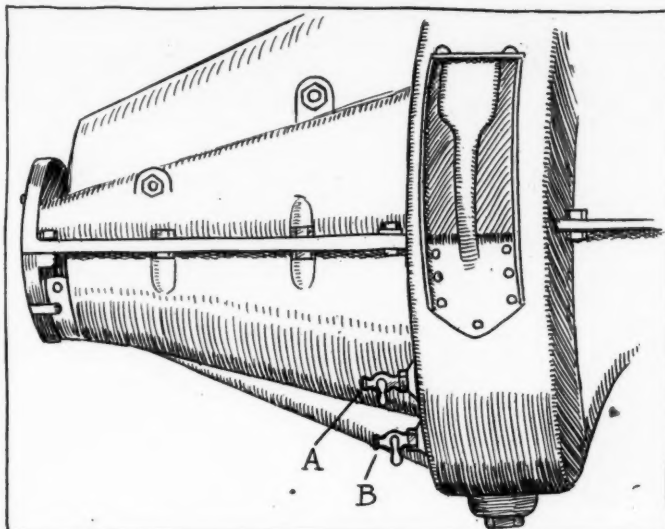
Trycocks for oil level on the Ford flywheel housing
